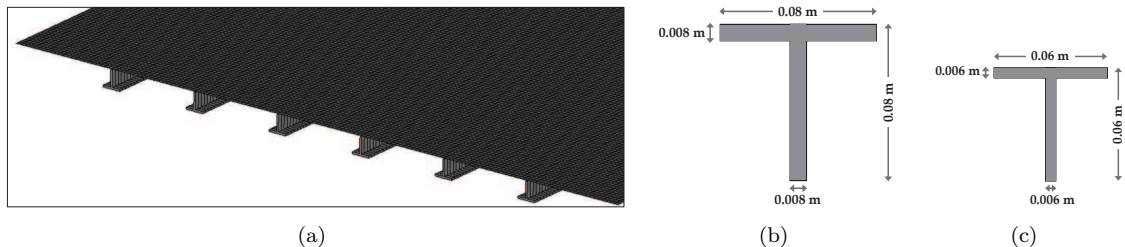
(a) Zoom view of the floor in the shipbuilding structure of Fig. 11. (b) Section of the floor ribs. (c) Section of the wall ribs.
